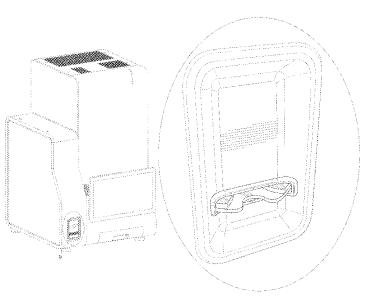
is an enlarged perspective view of detail "9" identified in FIG. 1;
